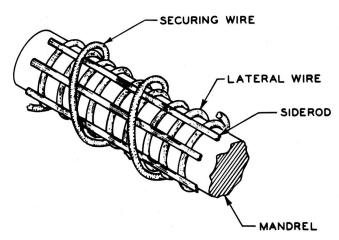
"Inside-out" grid strip assembly, showing mandrel, lateral wire, siderods, and external securing wire.
